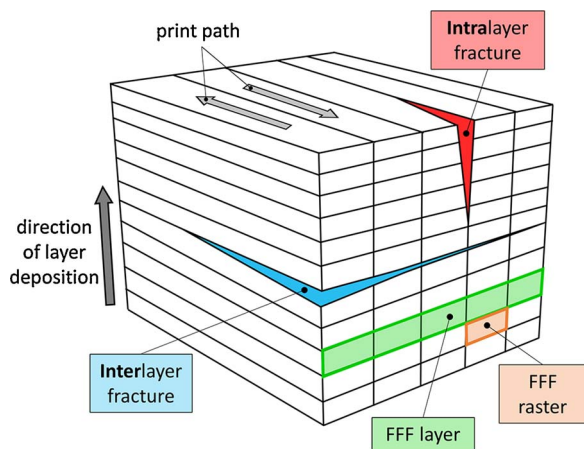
Definition of interlayer and intralayer fracture in FFF manufactured unidirectional components.
